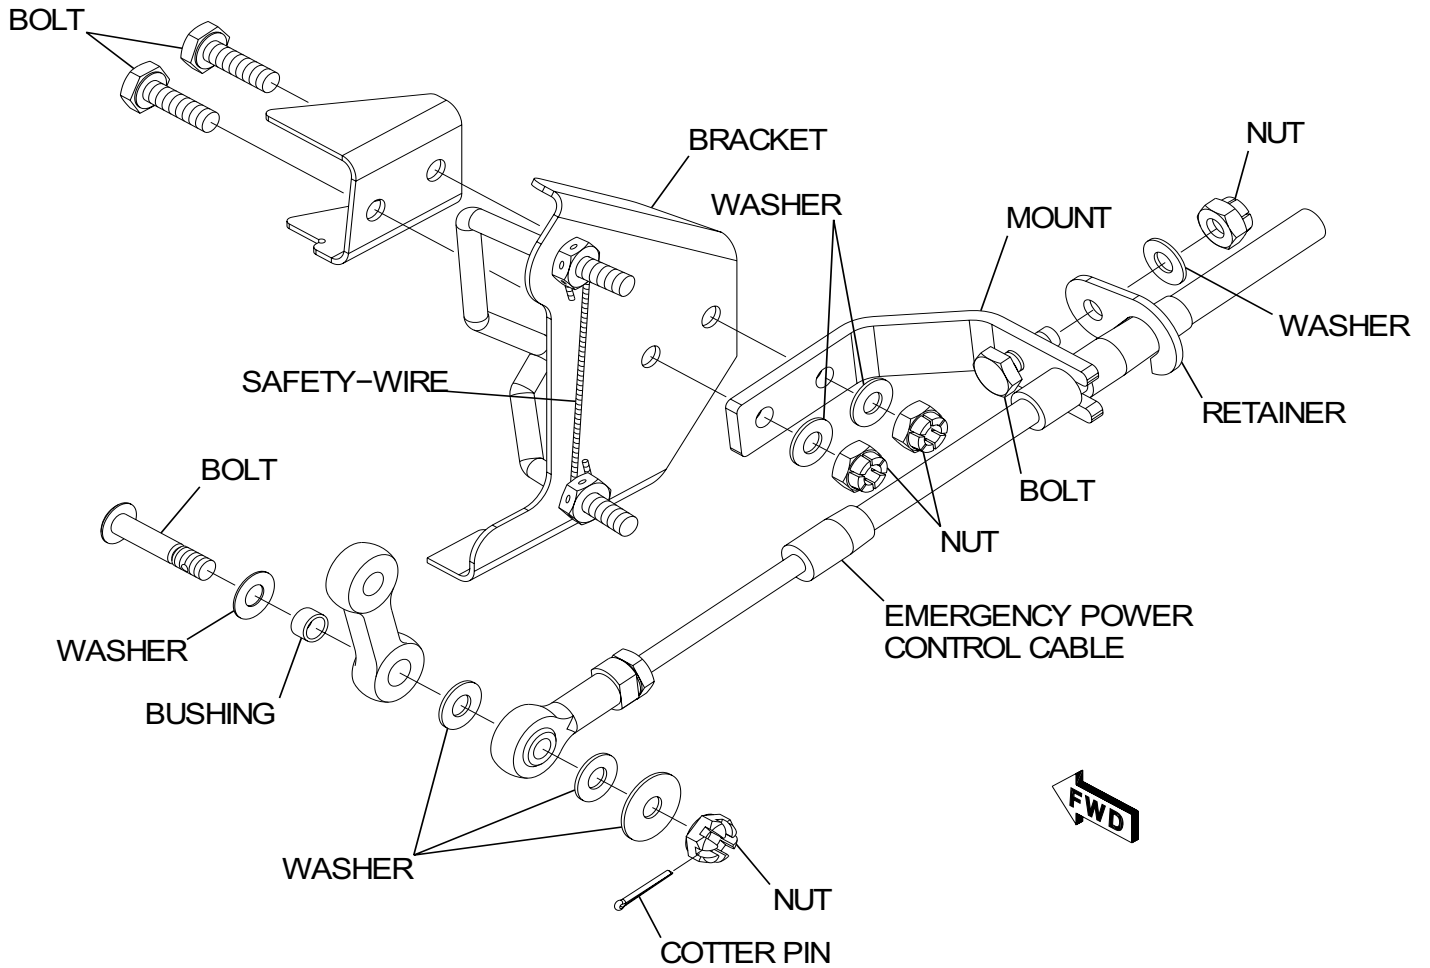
Sheet 3 : PT6A-114/PT6A-114A Engine Cable Installation
